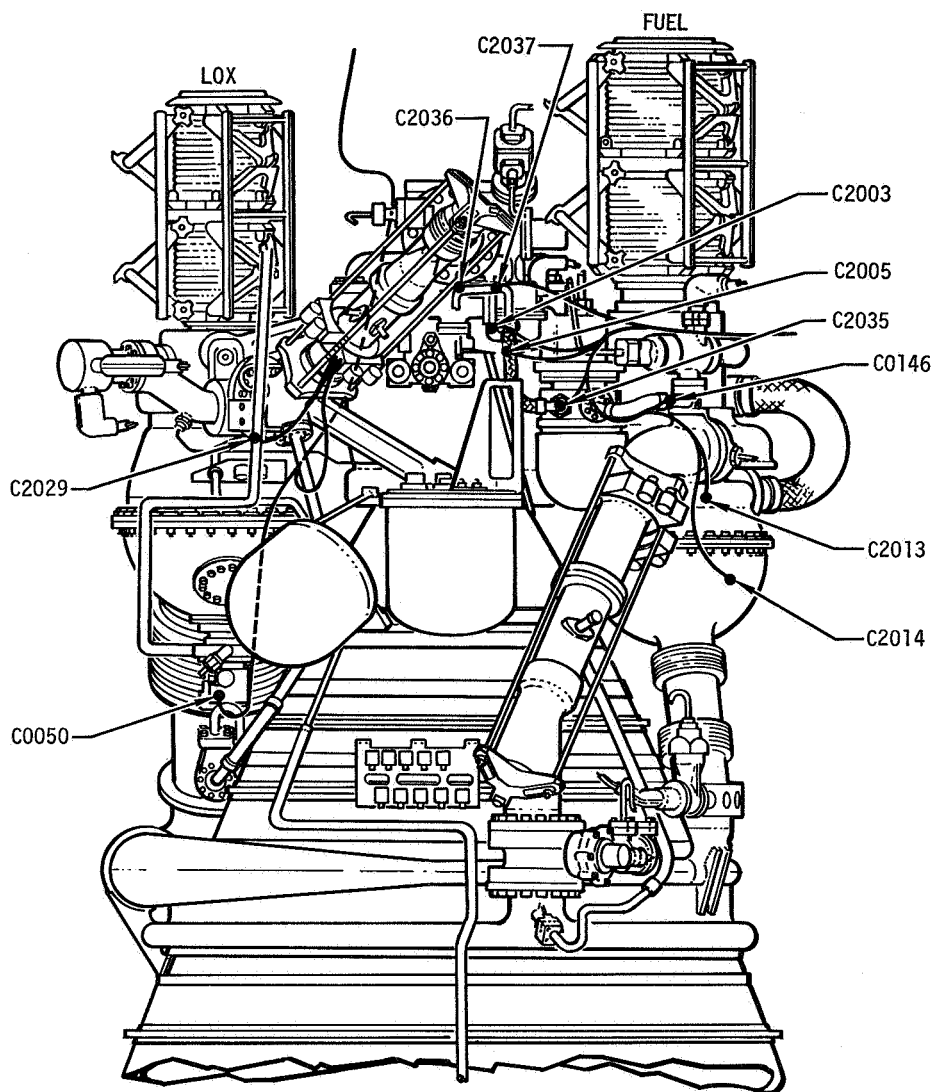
Engine Area Transducer Locations (Sheet 1 of 3)
